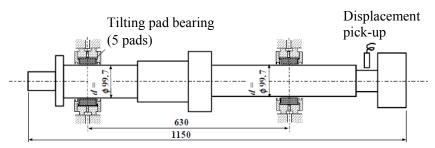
General arrangement of rotor & bearing (bearing load: 26/57 kgf)
